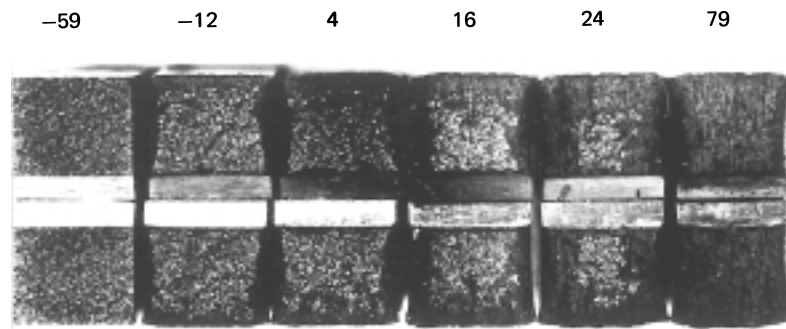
Photograph of fracture surfaces of A36 steel Charpy V-notch specimens tested at indicated temperatures (in °C). (From R. W. Hertzberg, *Deformation and Fracture Mechanics of Engineering Materials*, 3rd edition, Fig. 9.6, p. 329. Copyright © 1989 by John Wiley & Sons, Inc., New York. Reprinted by permission of John Wiley & Sons, Inc.)
